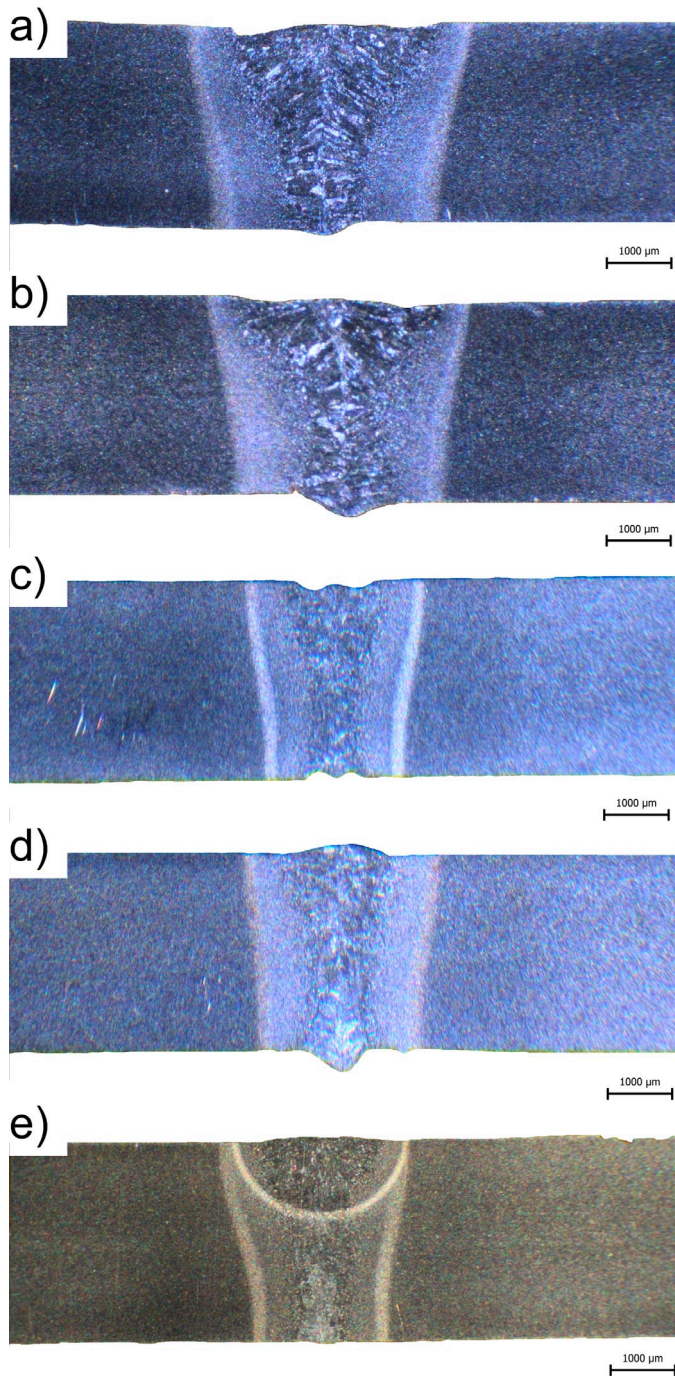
Macroscopic analyses of welded joints: (a) EBW, (b) LBW-S1, (c) LBW-S2, (d) LBW-FM, (e) LBW-D
